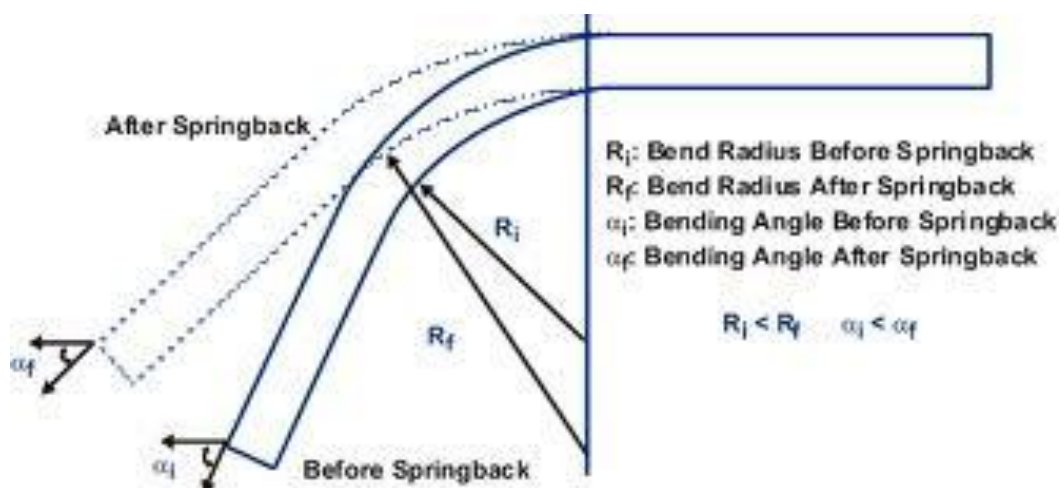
Spring-back Phenomenon in bending [REF: Manufacturing process for Engineering Materials ,KALPAKJIAN,Serope]
